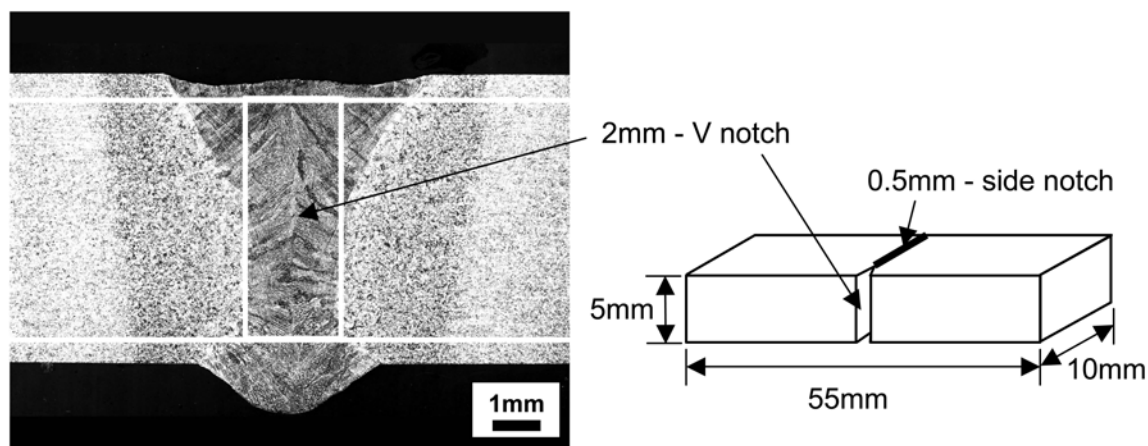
Notch location and dimensions of the Charpy impact test specimen of the laser weld metal.
